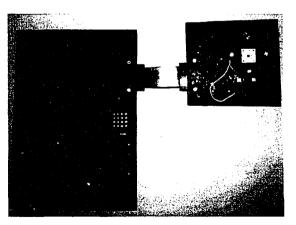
Phase II daughterboard/motherboard PCB assembly with high speed connector.
